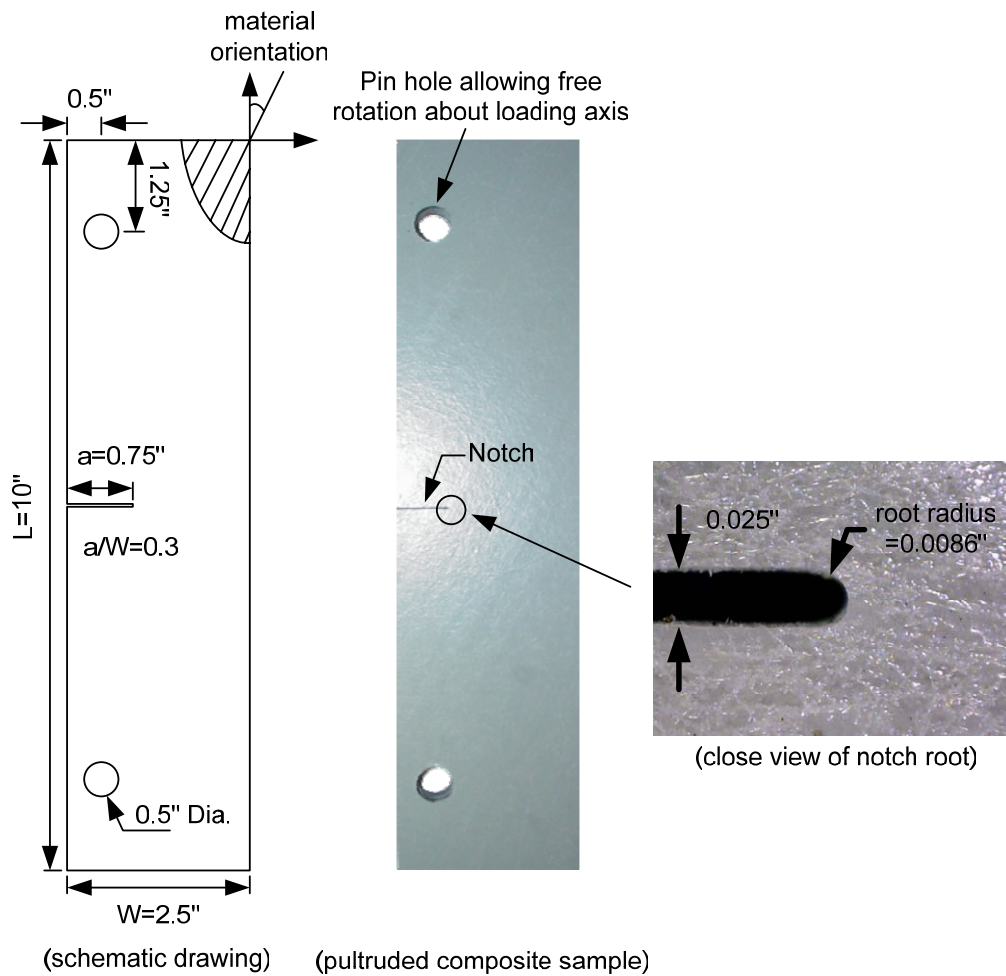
The ESE(T) composite specimen and its dimensions
